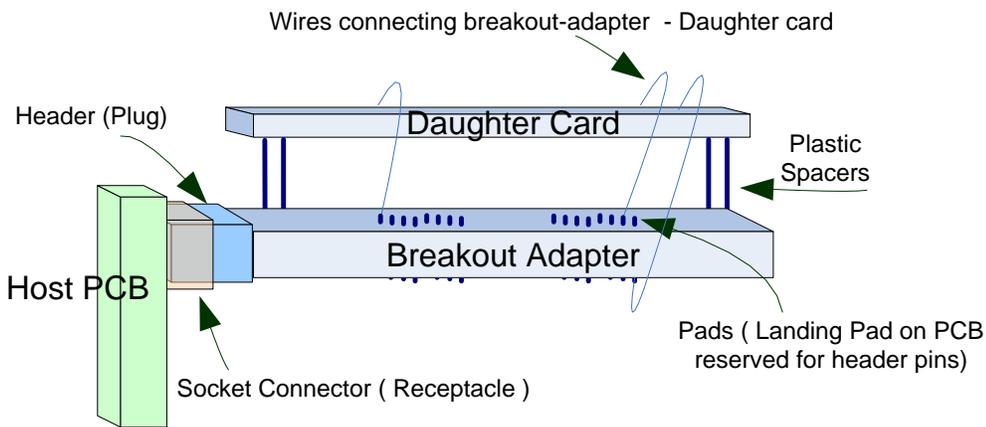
Placing Daughter card on top of Breakout adapter, 3D side view – REMOVED headers, interfacing directly to Pads (Header landing pads).
